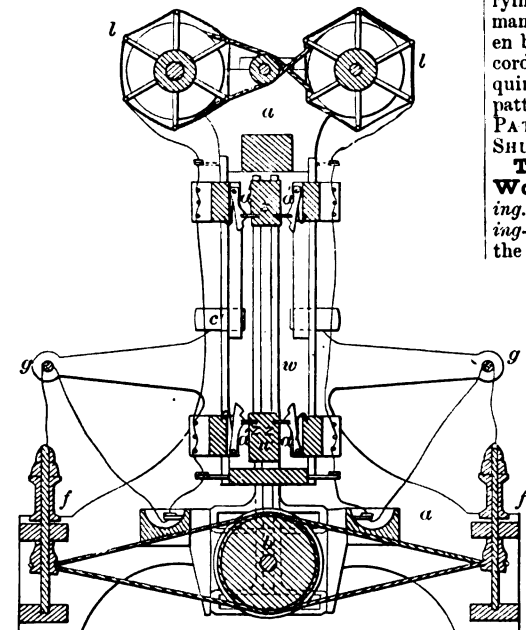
is a machine for laying the exterior layers of button-hole twist, etc., on the spool, so as to form various patterns. The spool is placed on a spindle upon the pulley *M*, and part of
